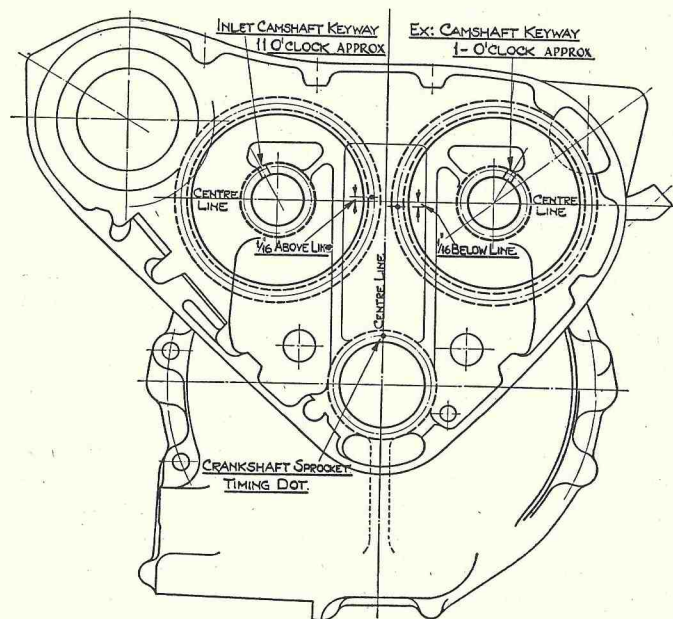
VALVE-TIMING MARKS ON 500-C.C. TWINS.
